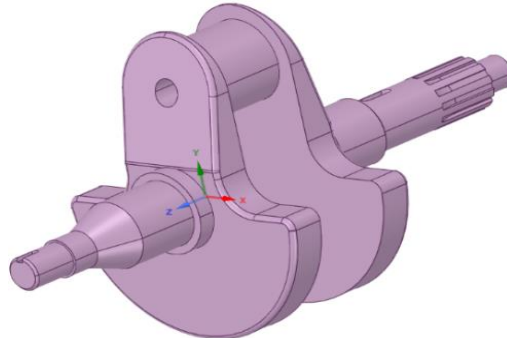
Modified crankshaft with inner and outer crankpin diameters
